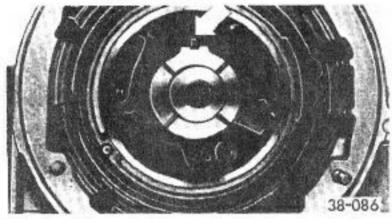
Piston for 1st gear brake band and oil pump, installing
